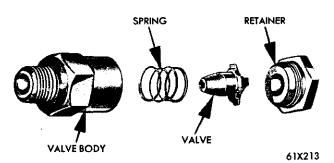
Crankcase Ventilation Valve (Disassembled)
